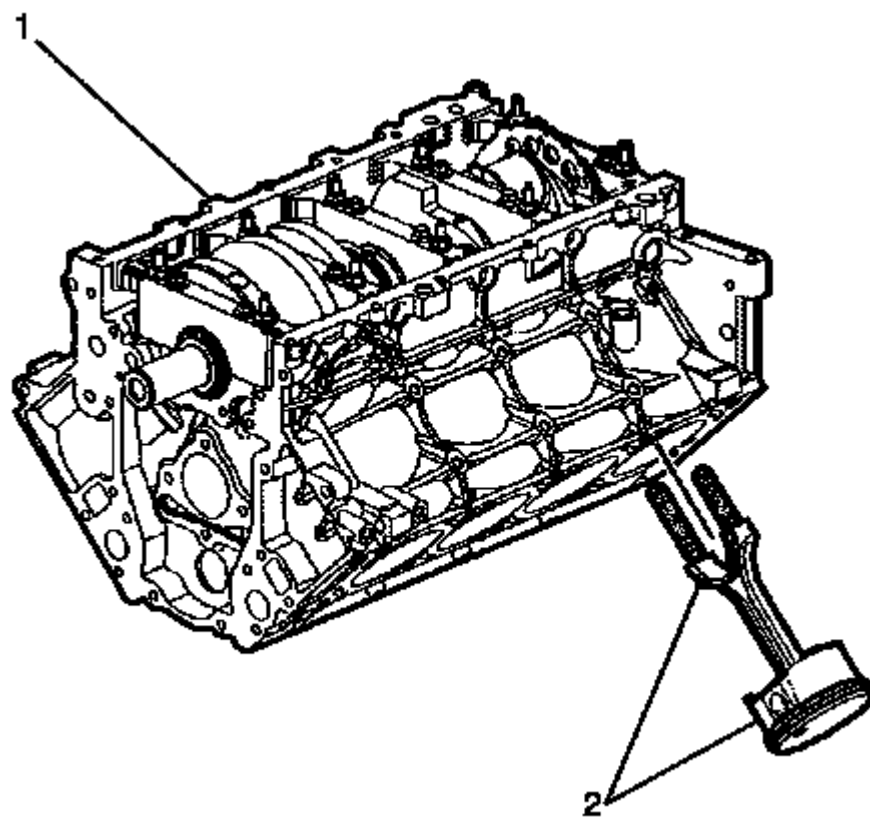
Identifying Piston & Connecting Rod Assembly With Cylinder Block
